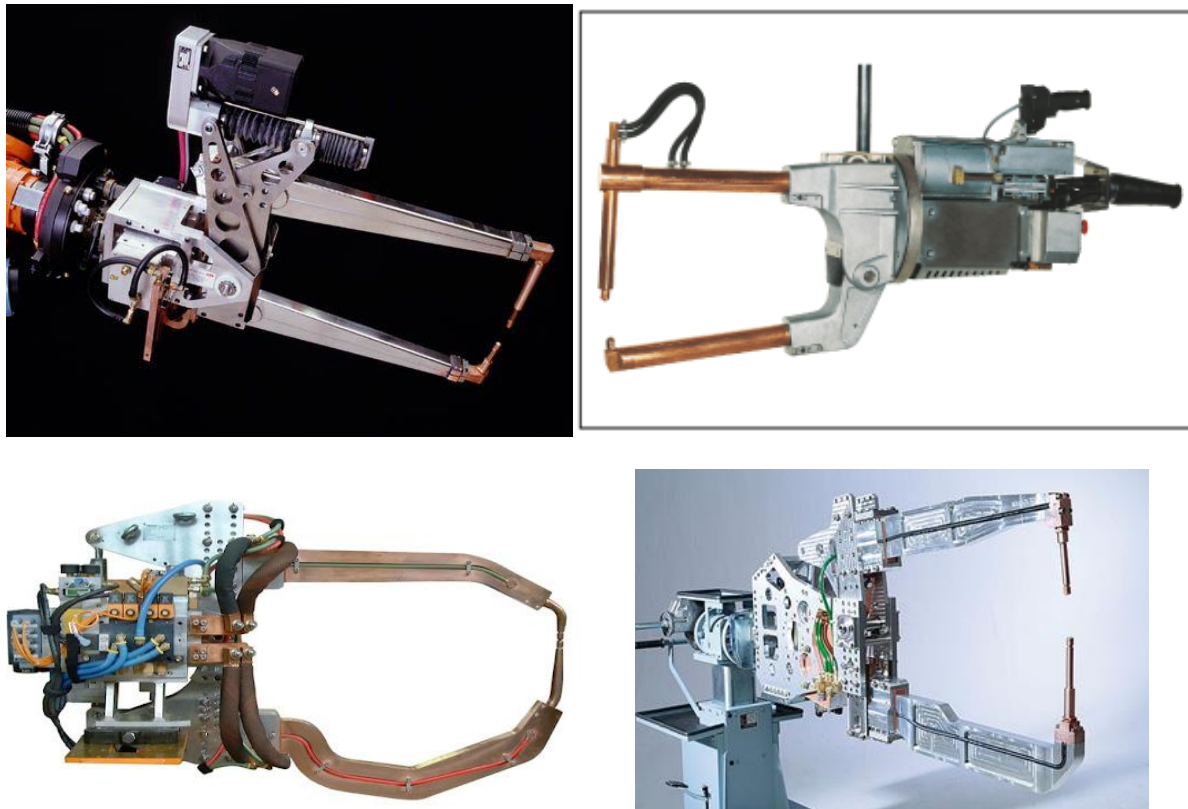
Different designs of X-type machines for spot welding. It can also be seen that the actuator is not directly connected to the upper electrode but rather rotates the full upper and/or lower arm [5], [36]–[38].
